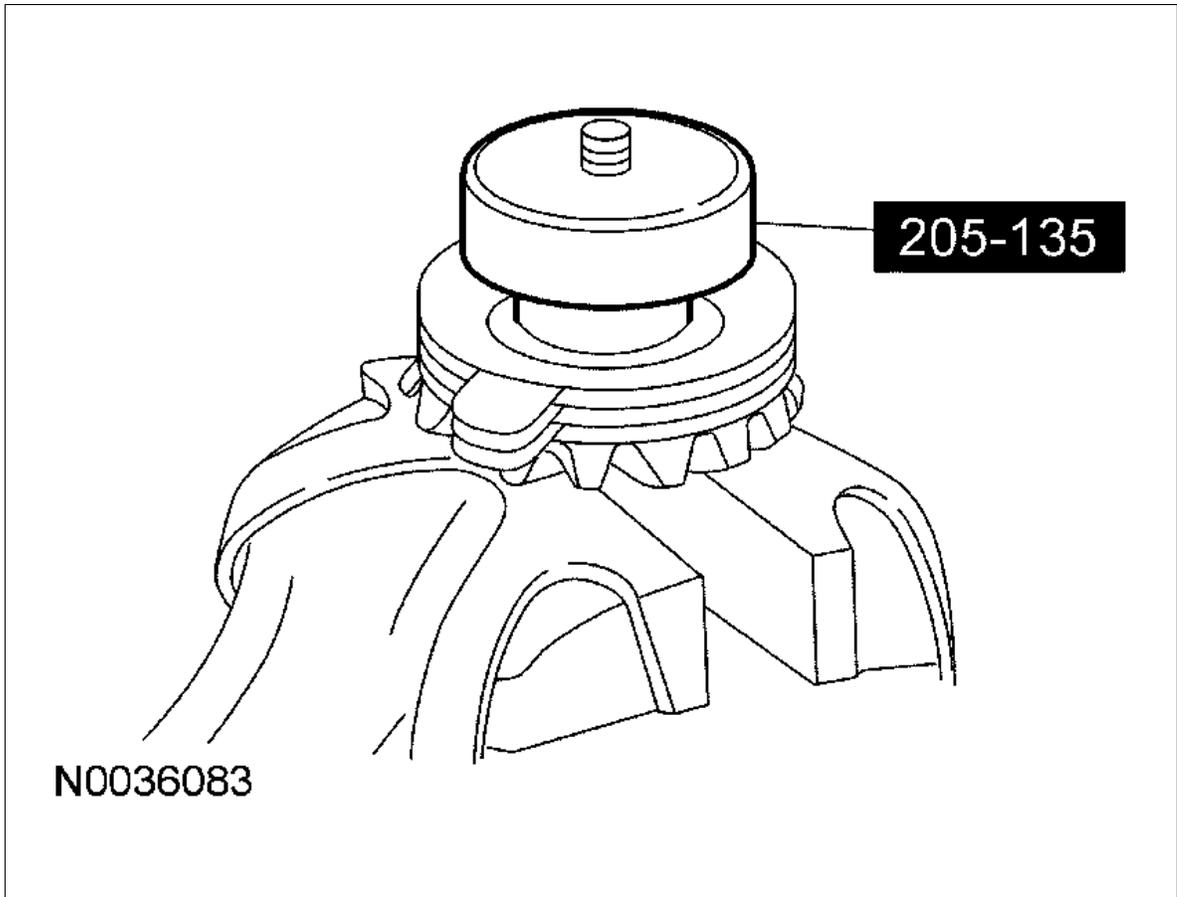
Installing Differential Side Gear And Differential Clutch Pack On Tool
